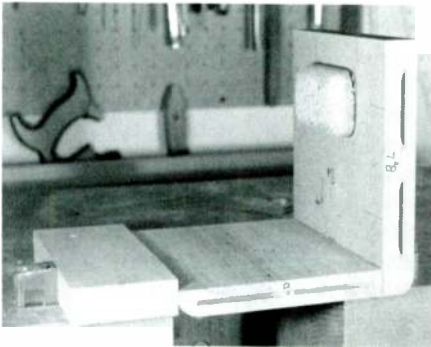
Gluing the slot sides to the back panels before assembly.
